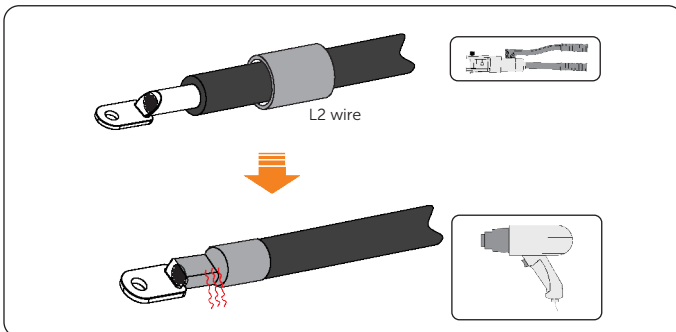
Crimping the terminal and heating the heat-shrink tubing
